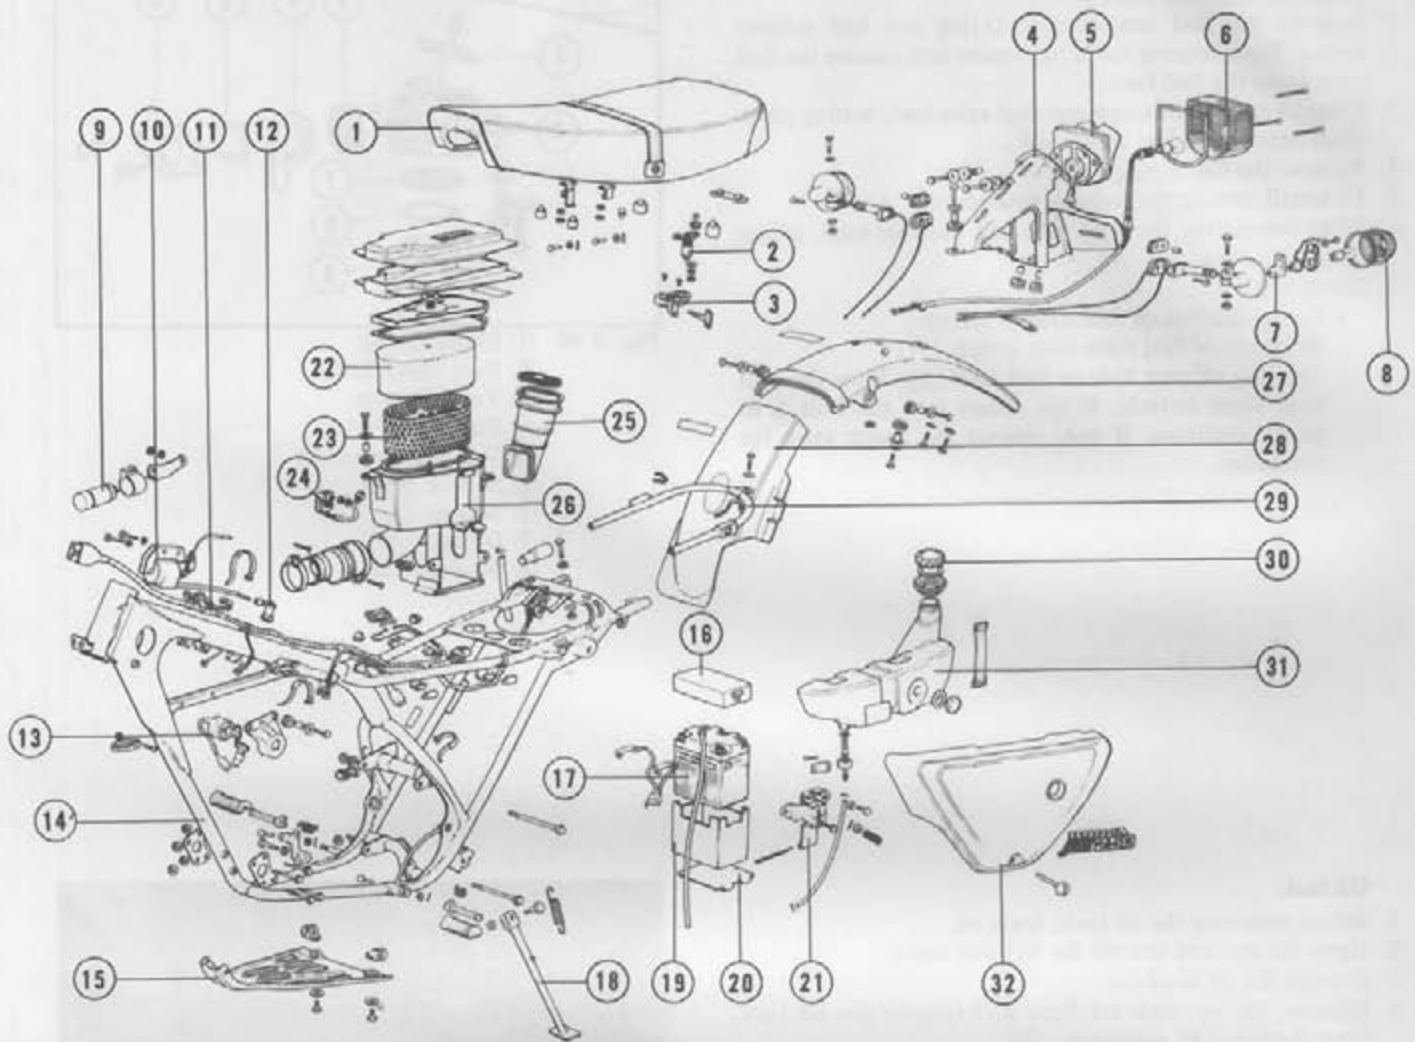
① Seat ⑫ Noise suppressor cap ⑳ Element holder
